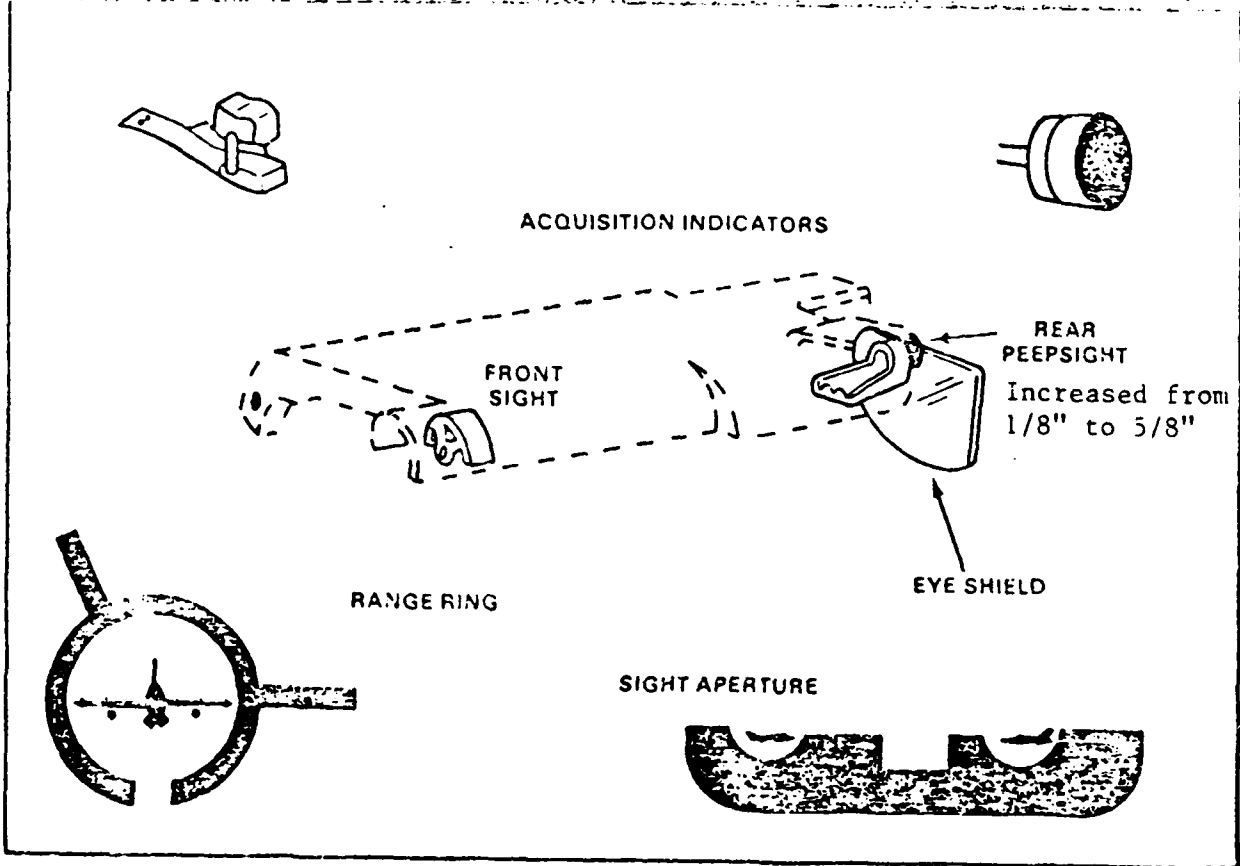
Stinger sight assembly (FM 44-18-1, 1984).
